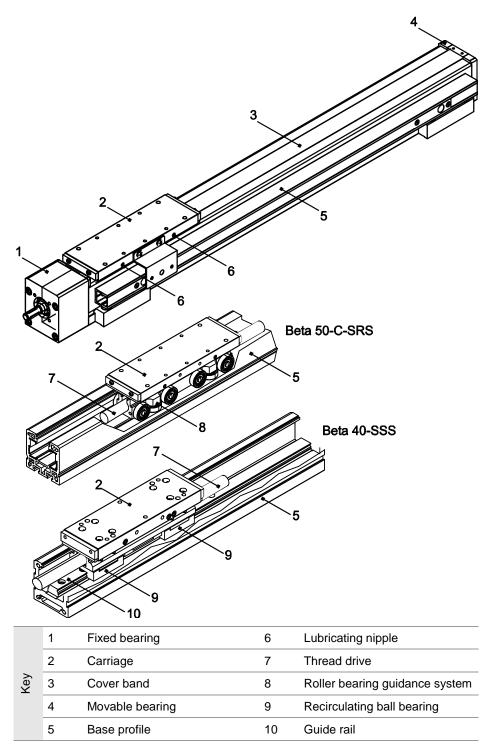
Component assemblies of the Beta 40 and Beta 50-C linear unit with spindle drive
